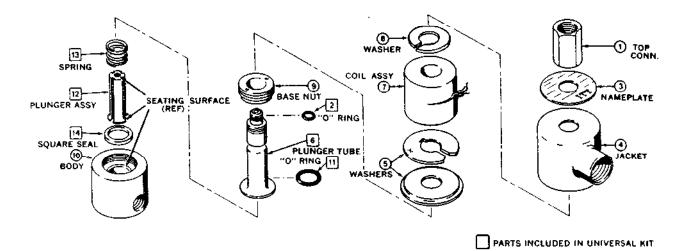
Exploded View of Typical S306 Model "A" Valve
